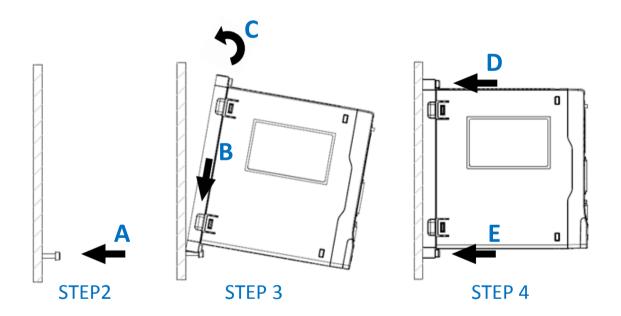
Mechanical Mounting of AMD2000 D2003 Servo Drive
